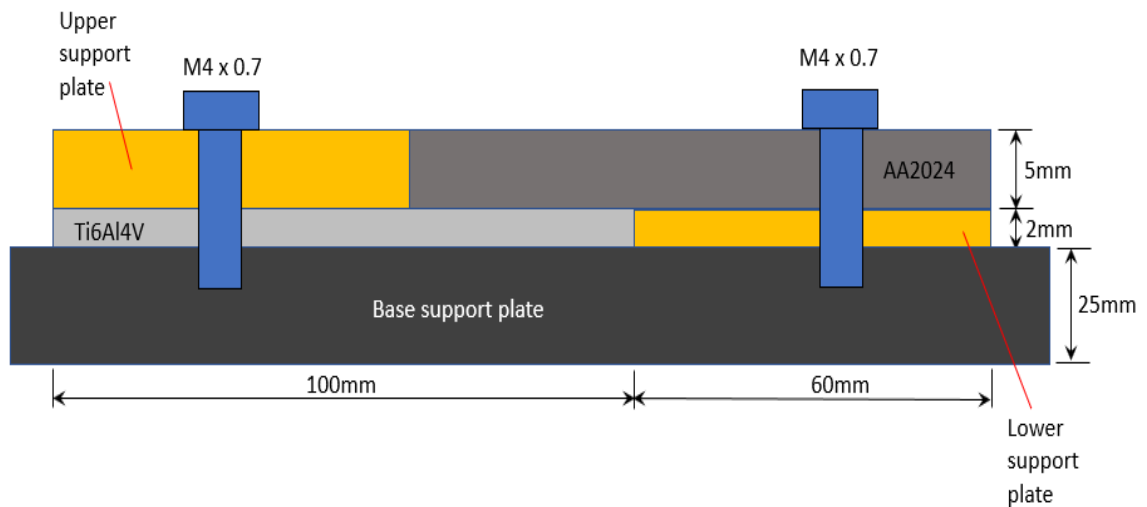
Schematic illustrations of clamped plates with the base plate dimensions with spacers (support plates) at each end bolted onto the base support plate.
